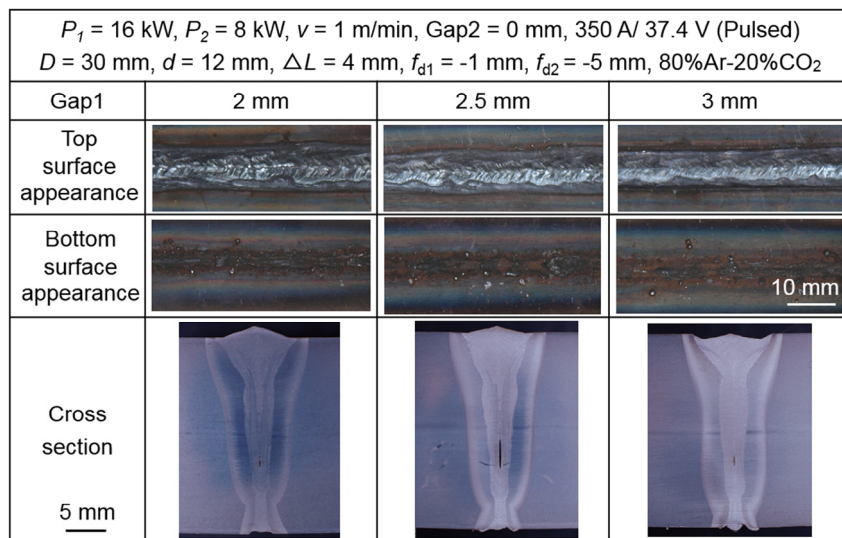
Surface appearances and cross sections of weld beads produced by laser-MAG hybrid welding at various gaps.
